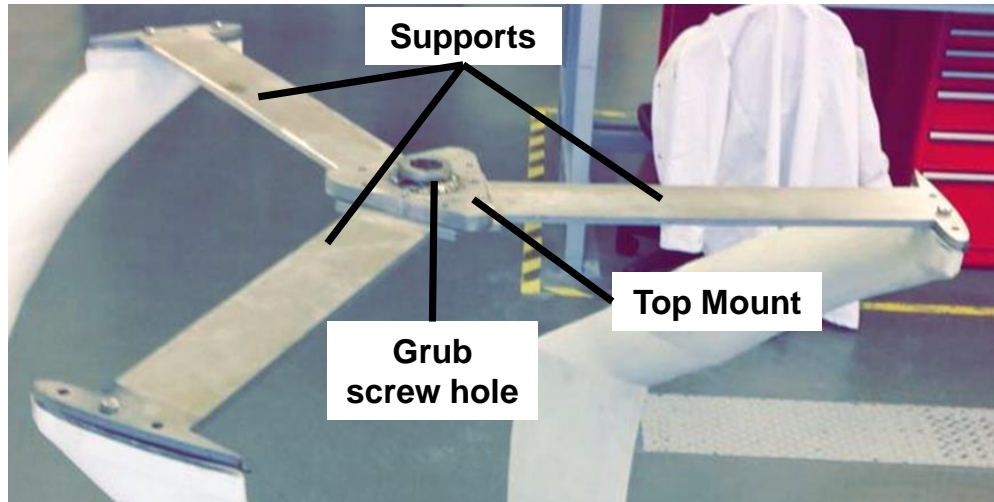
Image of stainless steel supports used to mount the turbine on to the rotor shaft.
